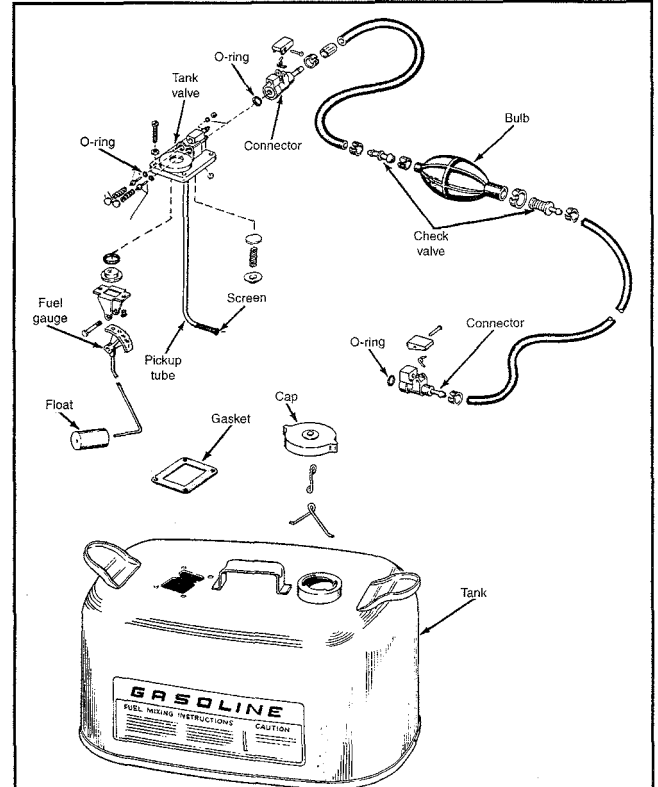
Exploded view of a typical Evinrude/Johnson portable fuel tank
